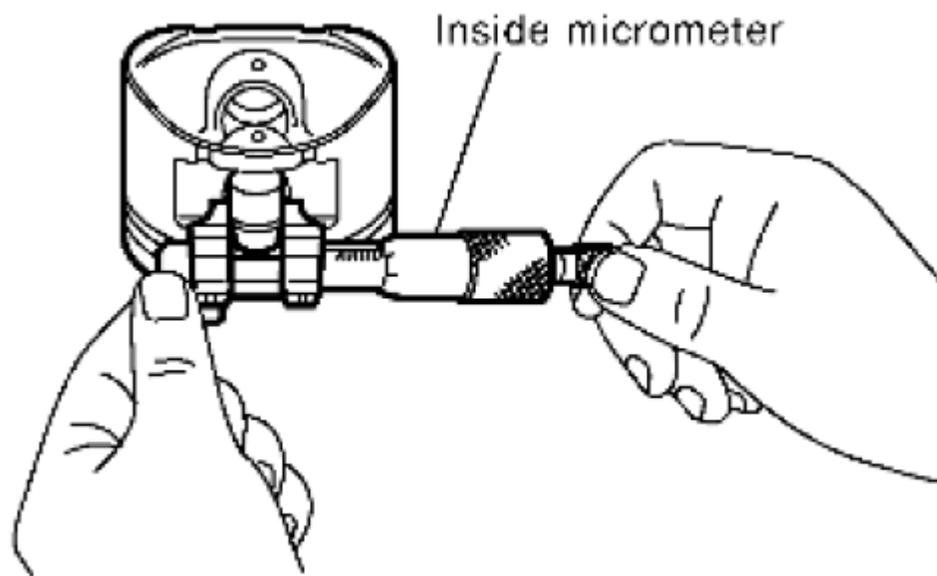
Measuring Inner Diameter Of Piston Pin Hole
